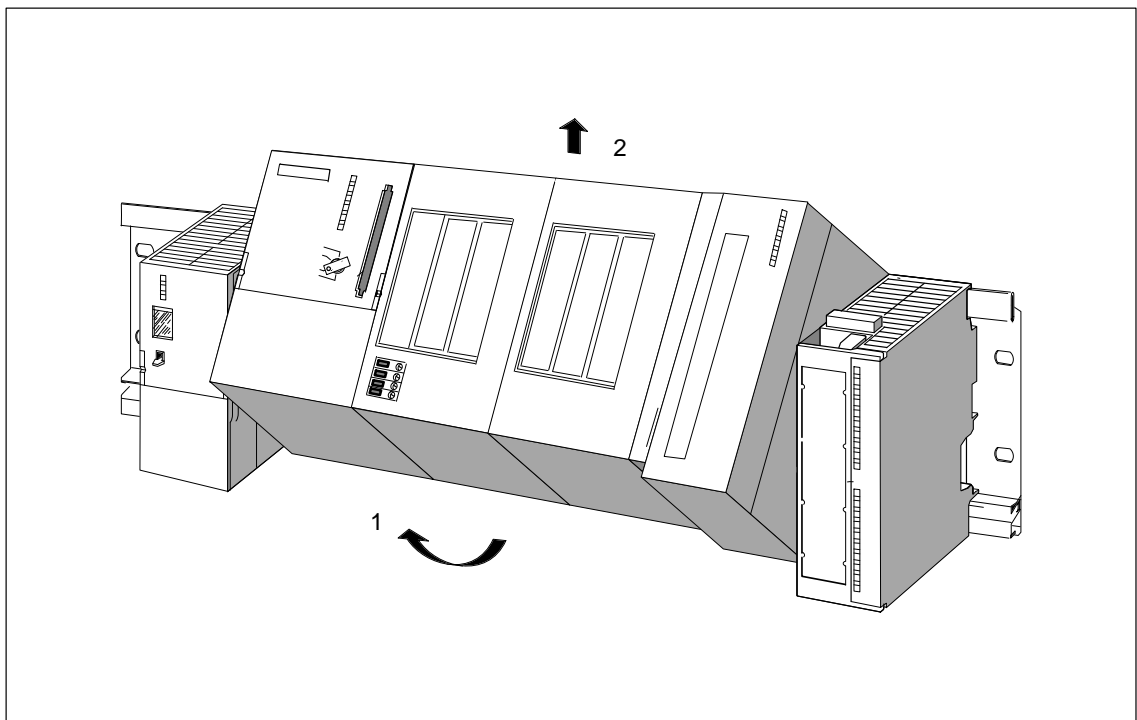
Swing the Module Assembly Containing the FM 356 and Expansion Modules Upwards and Lift Off
